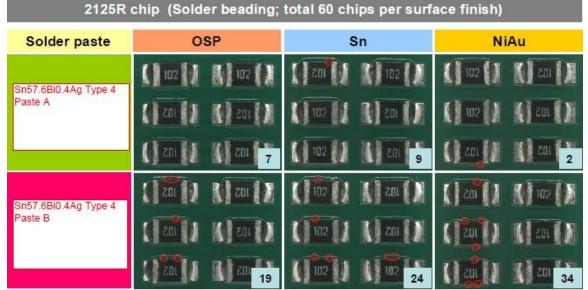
Sn57.6Bi0.4Ag Paste A versus Paste B solder balling on 2125 [0805] soldered pure tin coated chip components.
